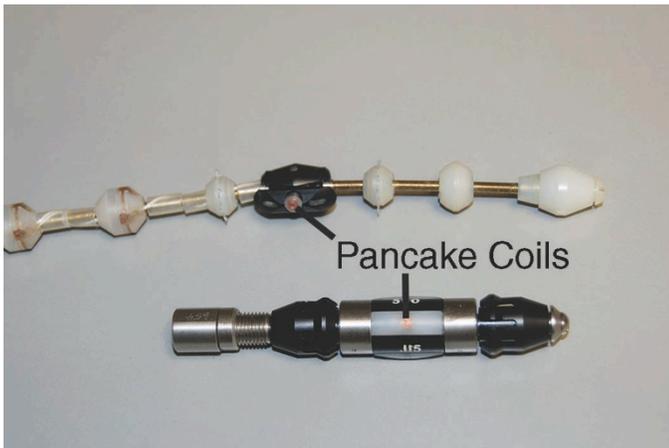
Probe coils mounted on a fixture to spin the coil inside of a tube to provide a focused surface scan. (Photo Courtesy of Conco Services Corp.)
